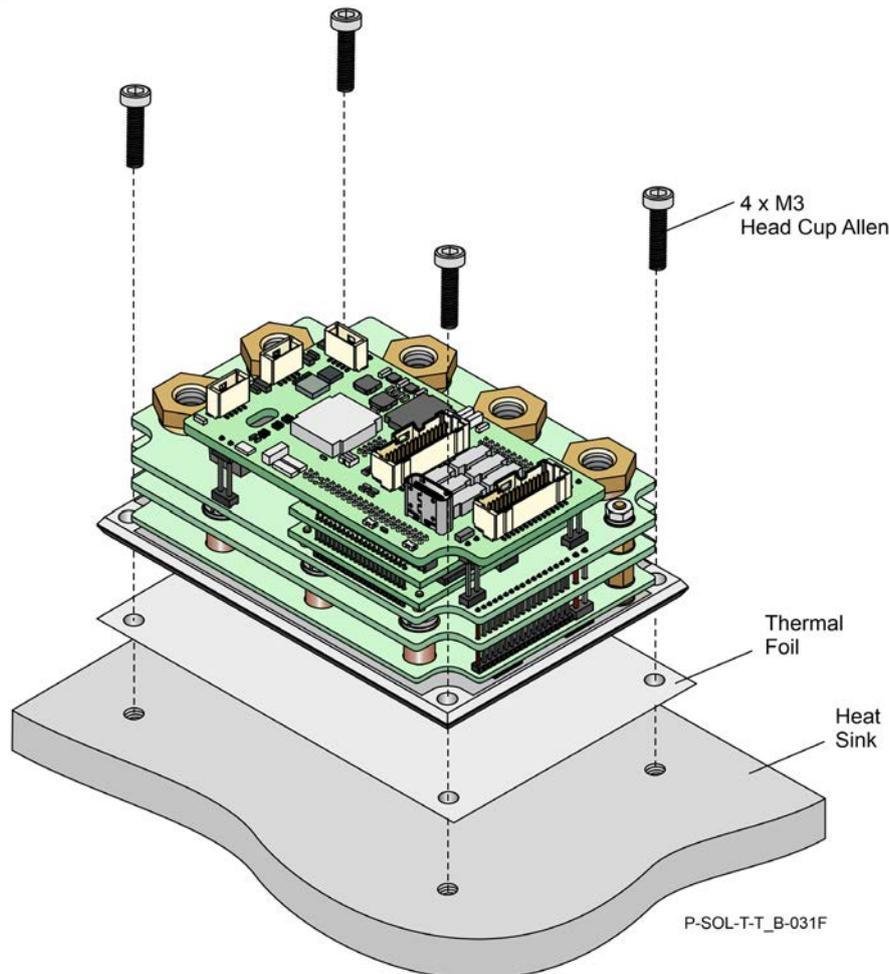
Mount the Platinum Solo Triple Bee to the Thermal Foil and the Heat Sink
